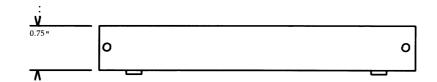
CM523D 16-Megabyte, Surface Mounted, RAM Card Layout
